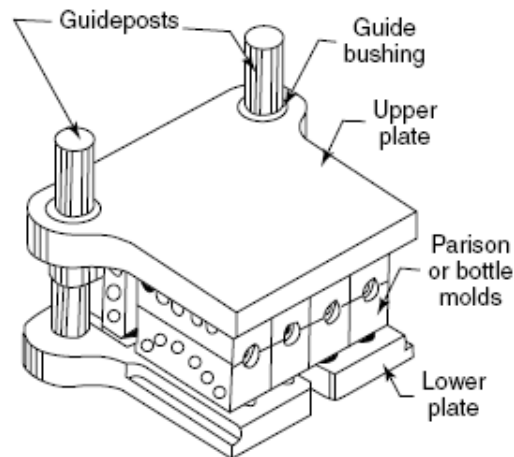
Die set for manufacturing position and alignment of injection blow-mold cavities.
